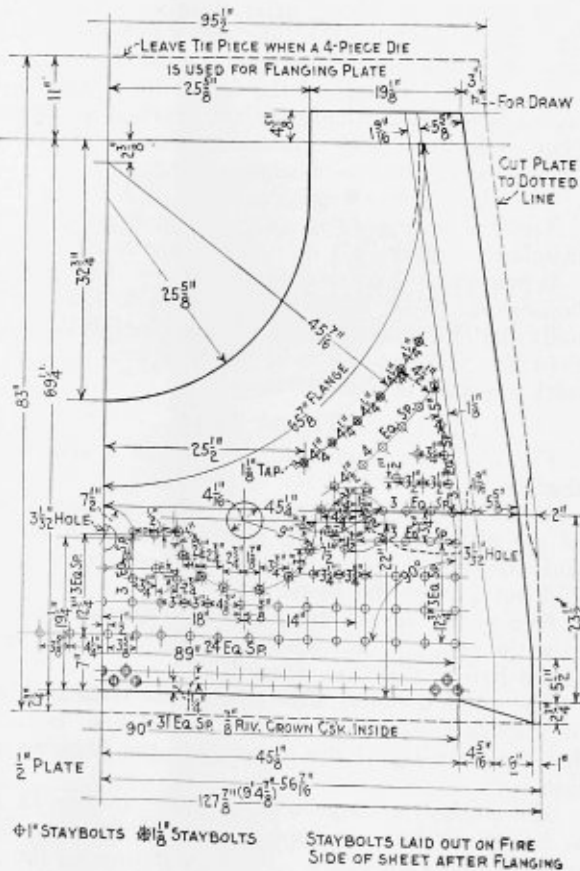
Inside throat sheet used with combustion chamber boiler
